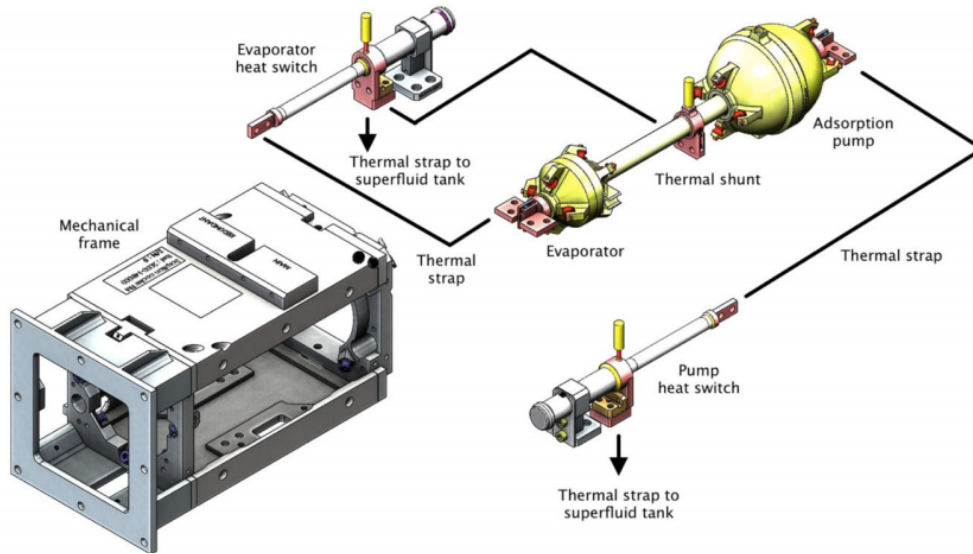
An exploded view of the ^3He sorption cooler used on *Herschel* [18].
